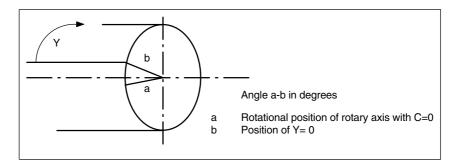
Center of rotation of axis on generated cylinder surface
